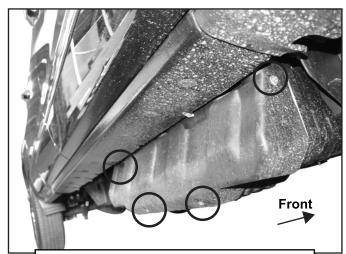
07-16 Passenger/Right DEF tank and cover
